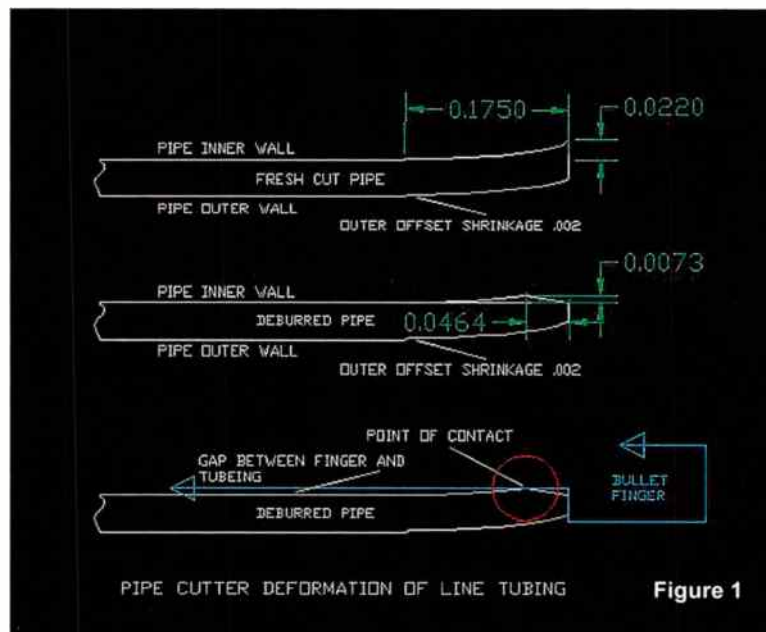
shows three actual measurements of different types of cut-off wheels and techniques of cutting. The inner conductor was cut on both ends with a pipe cutter, and the poor connection on the one end was worse than the other end and it simply burned the bullet fingers off, from the extremely concentrated points of contact from the rolled tubing edge, current, and lack of sufficient heat dissipation. Pipe cutting is an extremely controversial subject, but time and time again, with inadequate filing or de-burring, the use of a pipe cutter on inner conductors has proven to be the source of line, bullet, and component failures. One end of the horizontal cut piece
